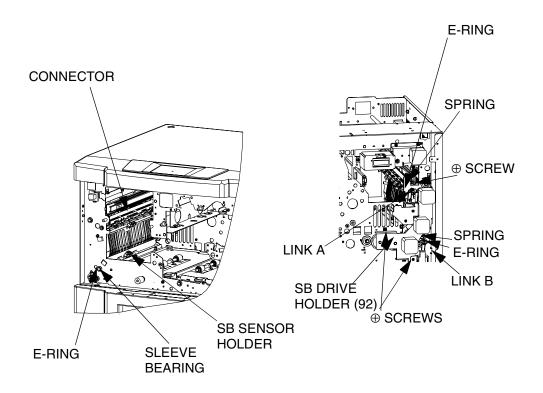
1 Removal of the Flip Paper Feed Roller Assembly
